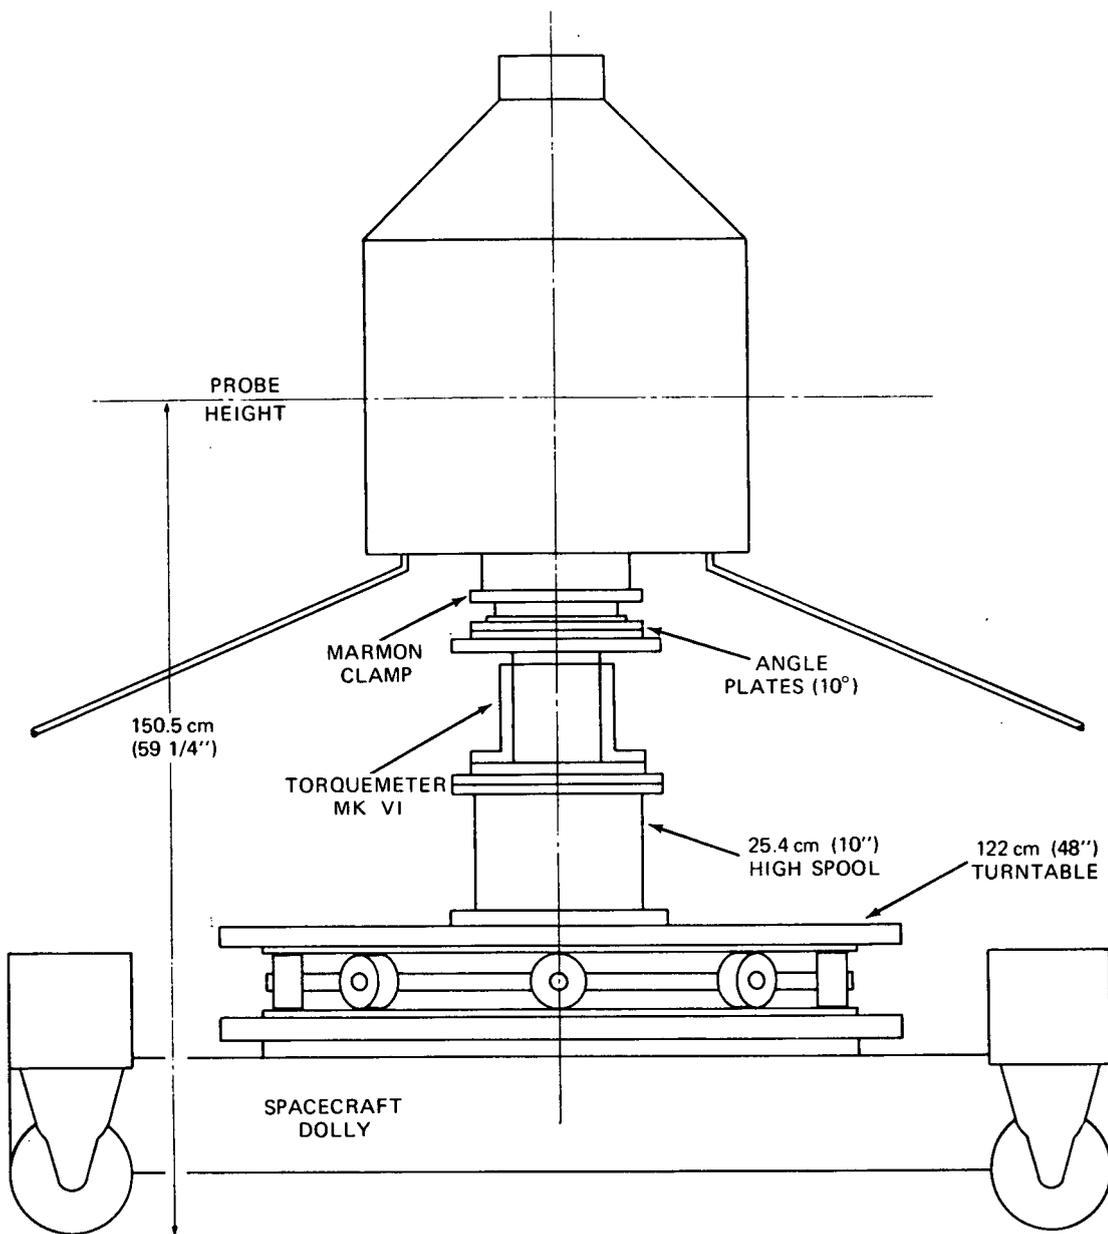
UK-4 Prototype Mounting for Spacecraft Tests
